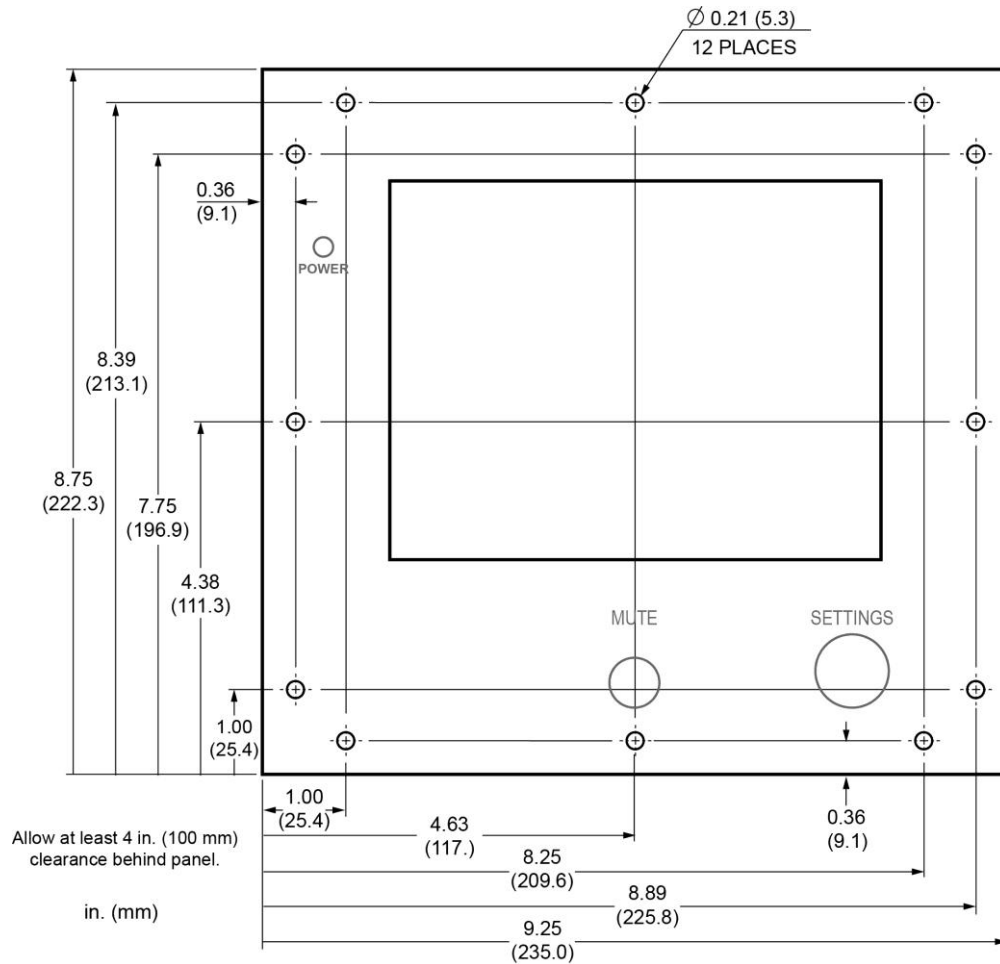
WPC APEX Panel-Mount Faceplate Dimensions
